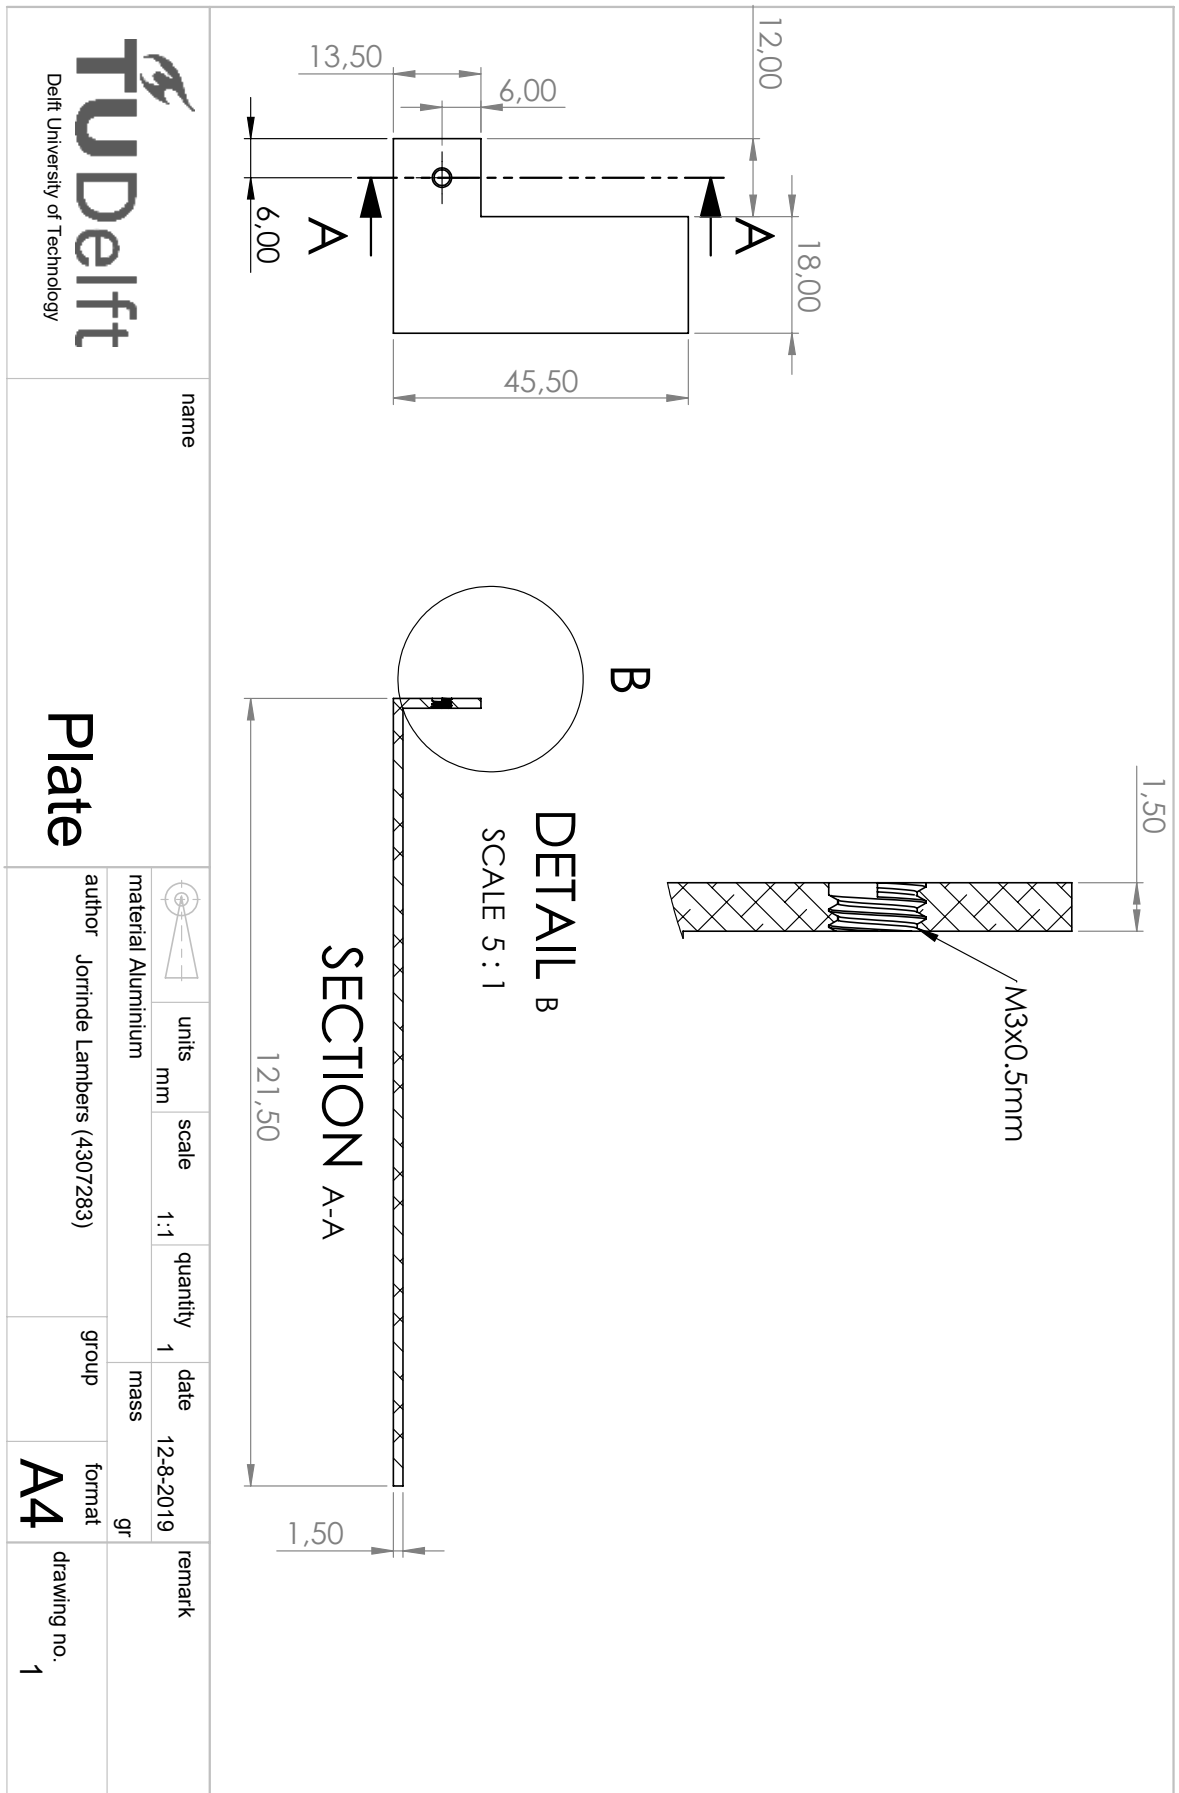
SolidWorks drawing of component number 1: Plate.
